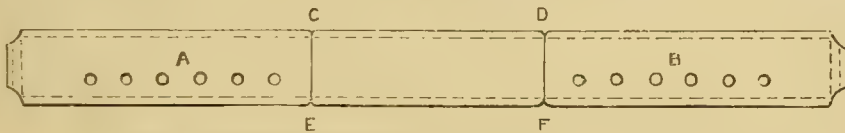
STRIP FOR CONNECTING FRONT AND BOTTOM (E PIECE).
